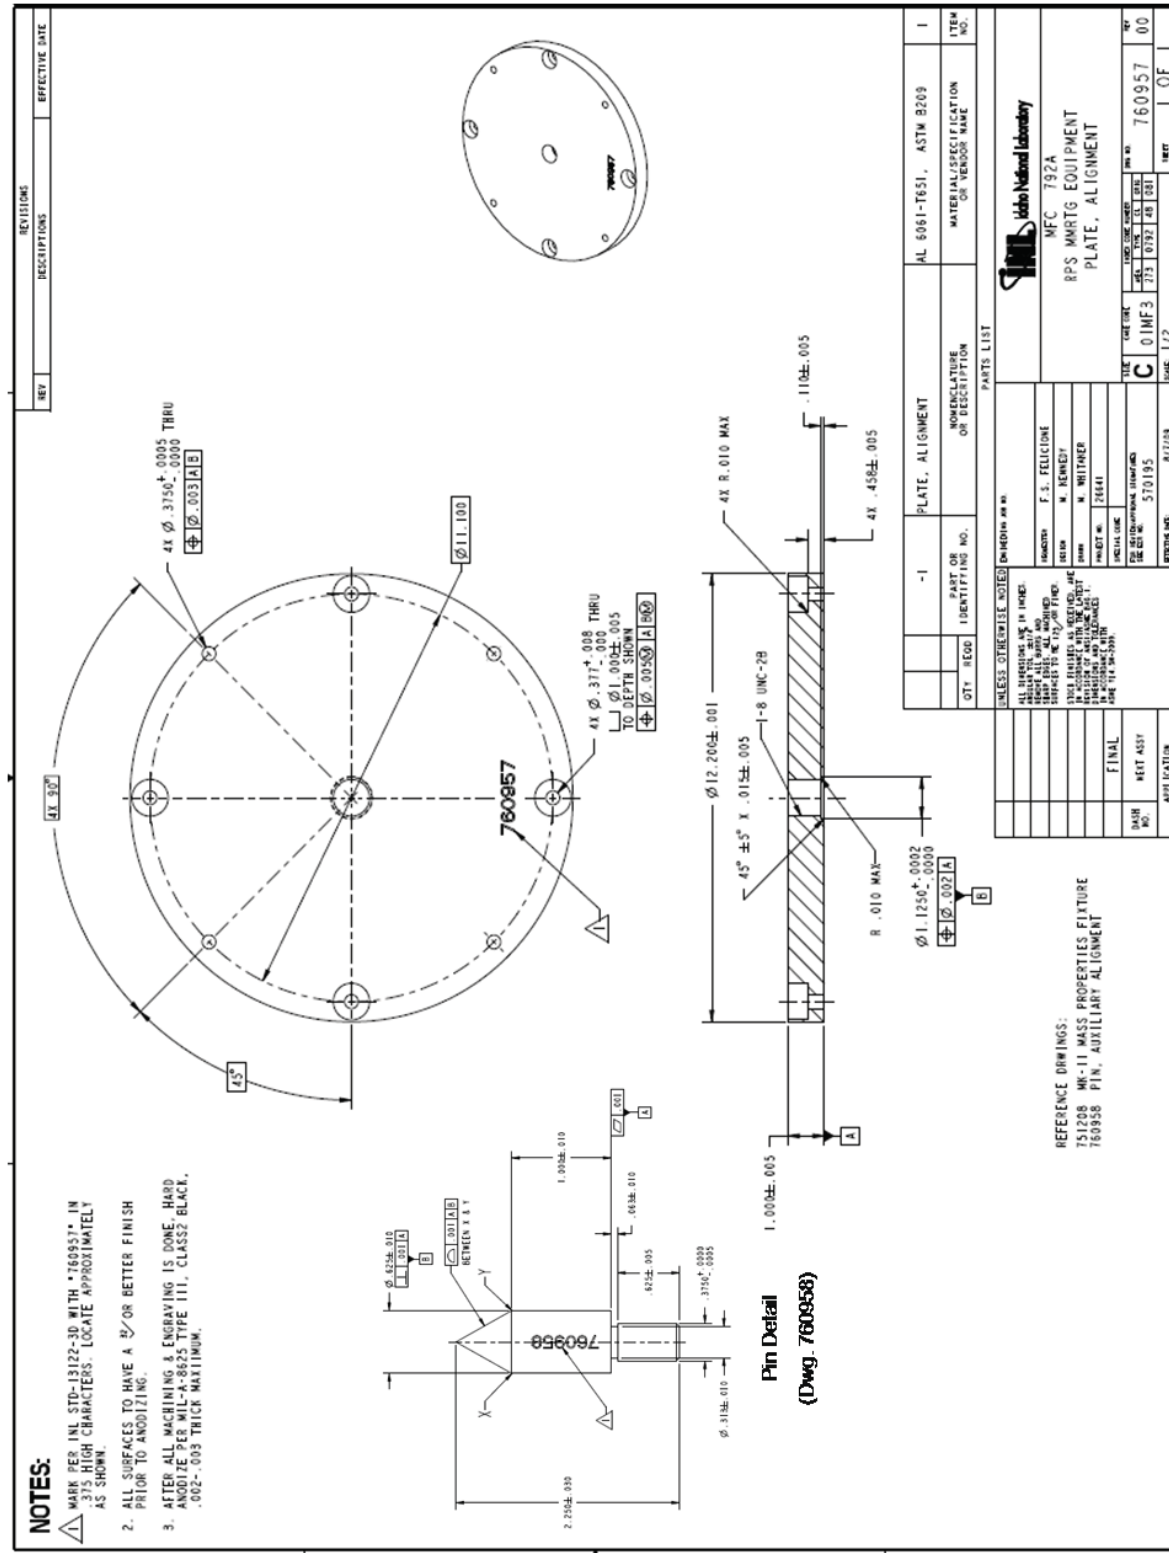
Auxiliary alignment flange (pin detail superimposed)
